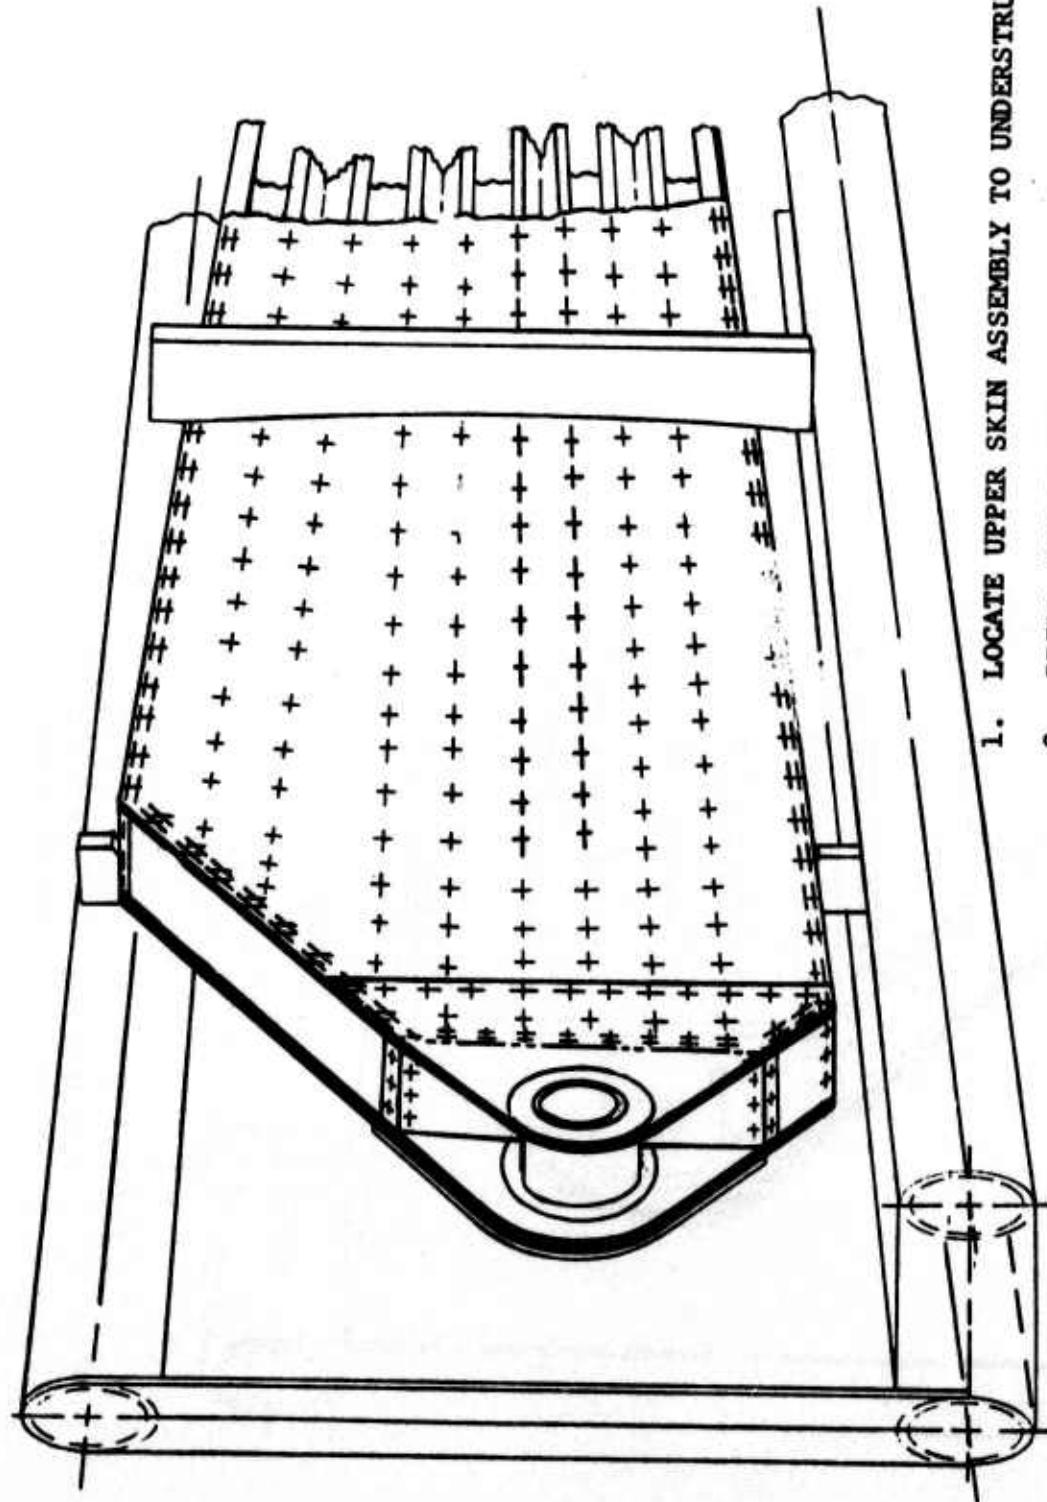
Secondary Manufacturing Final Assembly Upper Skin and Understructure
